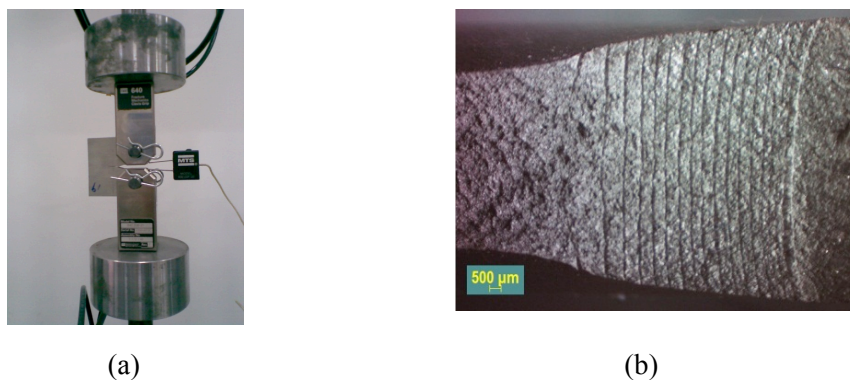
(a) The compliance method and (b) beachmarks on the fracture surface for CT specimen.
